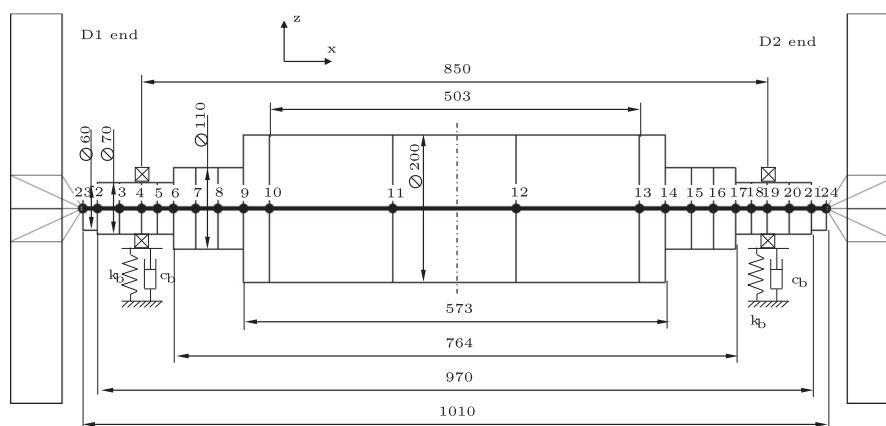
Layout and finite element discretization of the turbo blower with two impellers. The dimensions are in millimeters. The slitted part of the rotor is between nodes 10 and 13.
